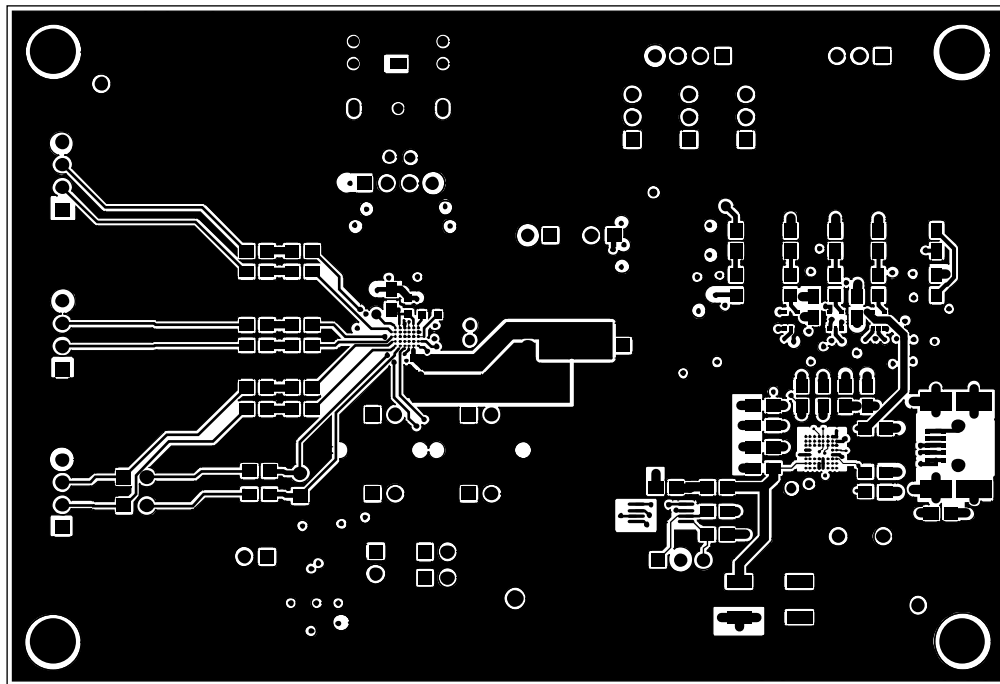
Evaluation Board Layout, Primary Side (Layer 1)
